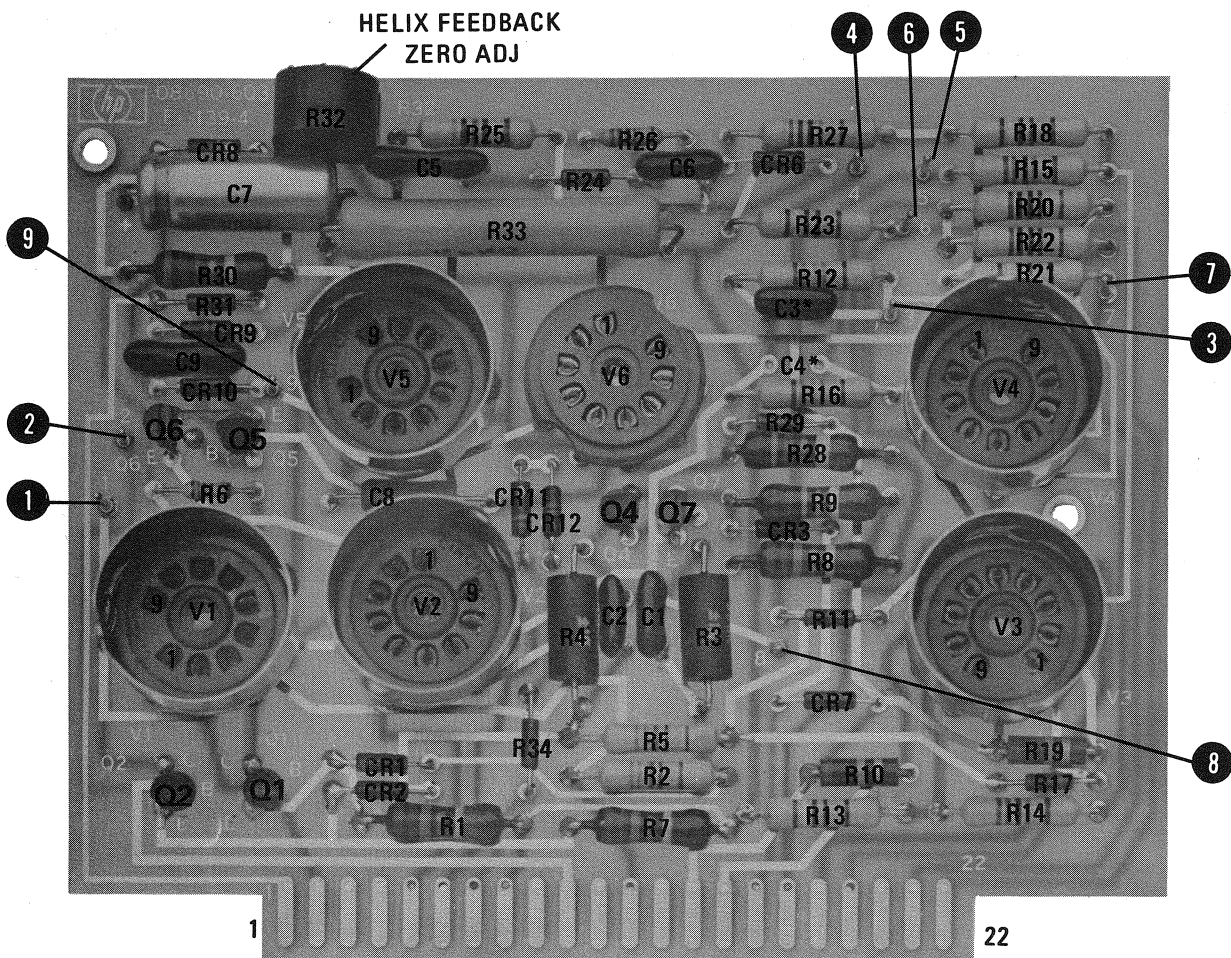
Component Identification, A4 Assembly (Part of Change 15)
